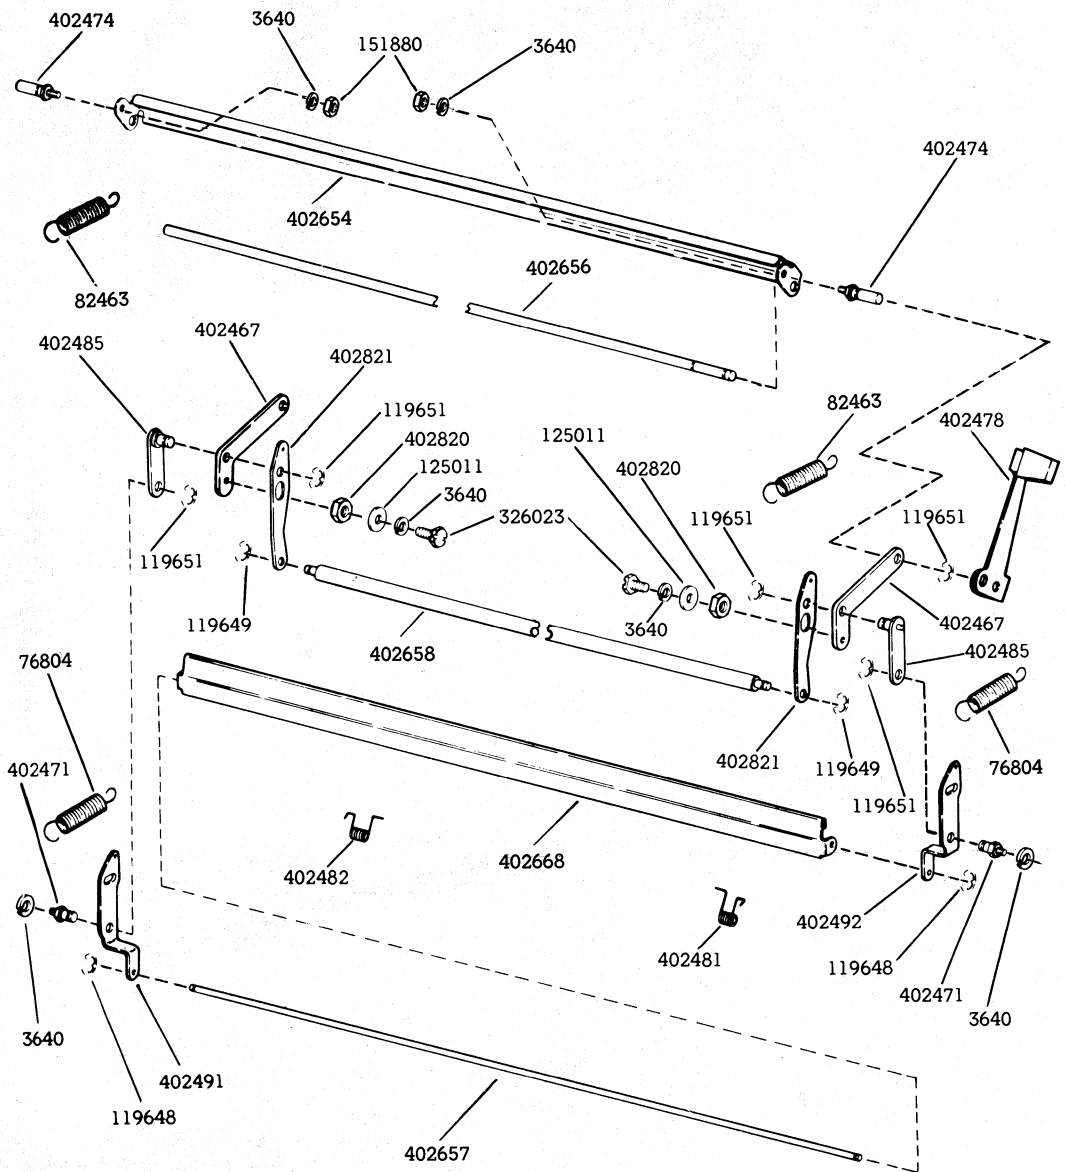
Paper Handling Assembly (Tractor Feed - 132-Column) (Cont.)
